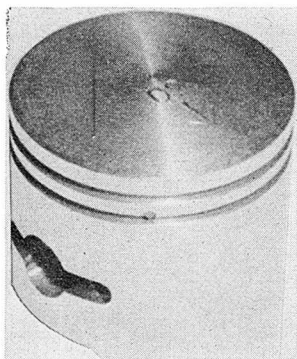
Pistons are usually installed with the arrow on dome toward front HOWEVER, piston ring locating pins must always be toward rear of engine.
